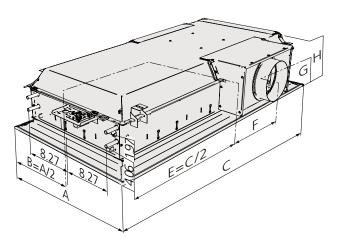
Dimensional drawing - long side connection (the length 4 ft.) with air connection on side 2 is shown in the example).
